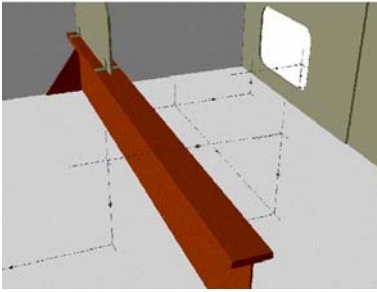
View of PathPlanner for off-line specification of the robot welding and inspection task
